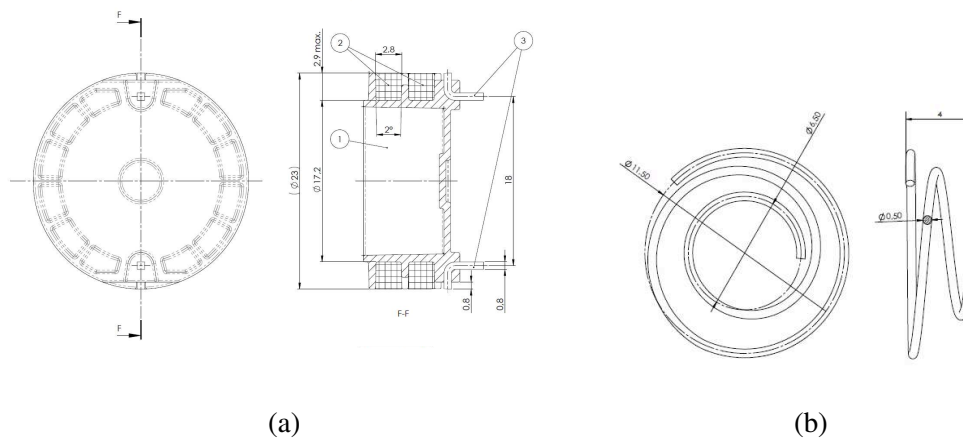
a) Drawing of the case element (1) with coils (2) and connecting pins (3), and b) drawing of the conical spring. (Dimensions are in mm)
